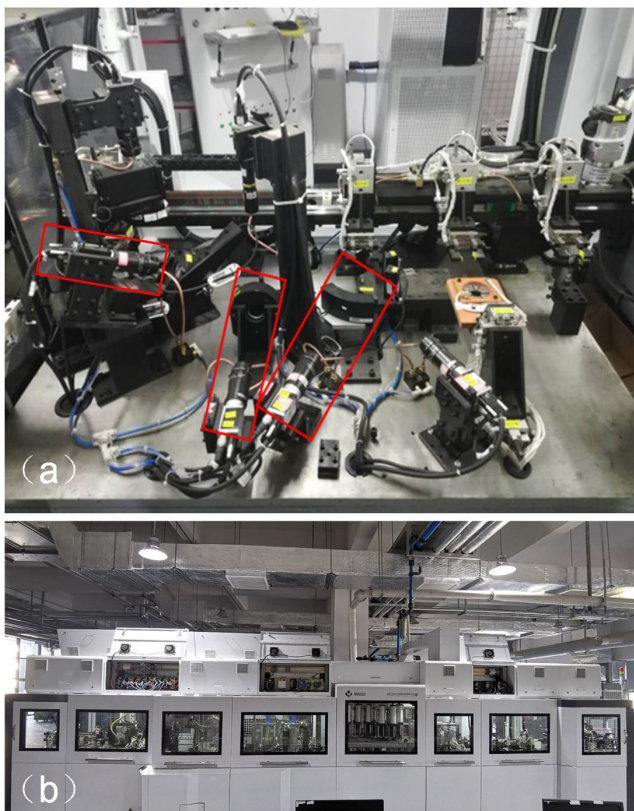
Motor commutator defect inspection equipment. (a) Overall structure design of inspection table, the cameras marked with the red boxes capture the images; from left to right: MCS D-h, MCS D-c, and MCS D-g. (b) Motor commutator production line.
